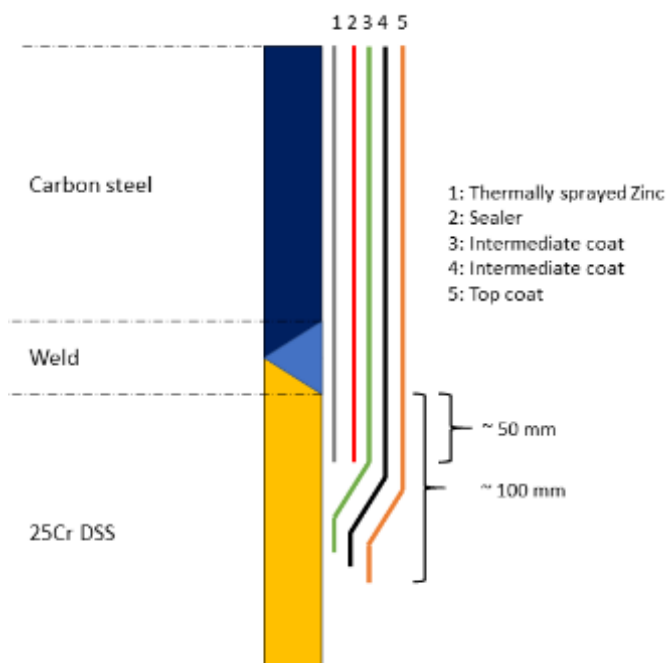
Coating of weld zone and onto CRA to avoid galvanic corrosion
